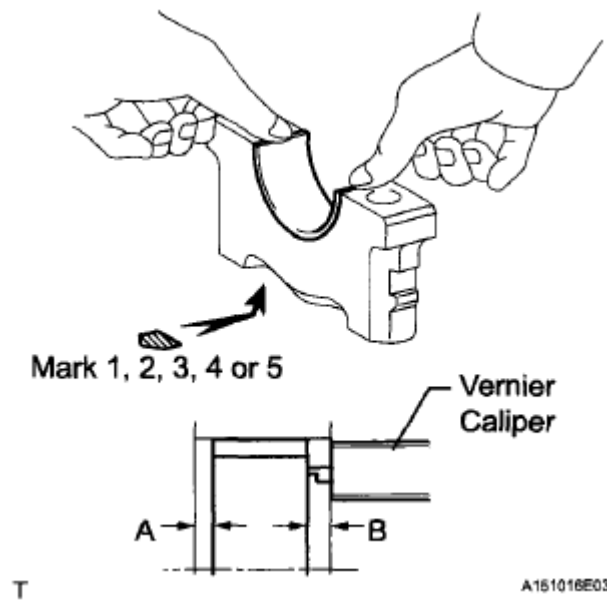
Measuring Distance Between Bearing Cap Edge And Lower Bearing Edge
